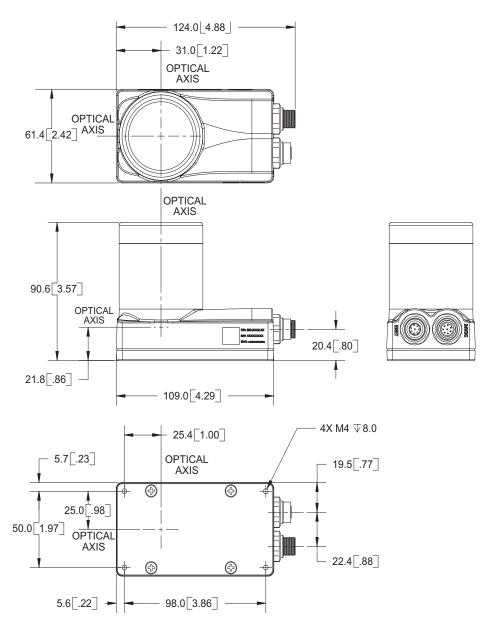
Stainless Steel Vision System Dimensions (With Lens Cover)
